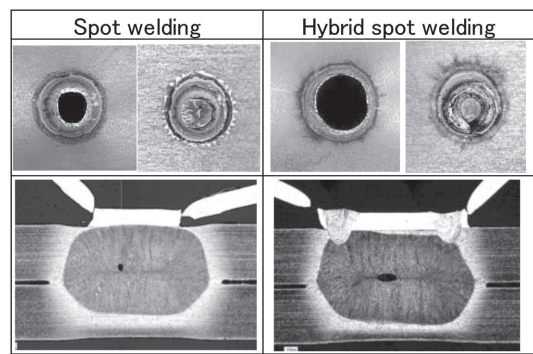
Surface appearance and macro cross-sections of spot and hybrid spot weld after cross tensile test (welding current 6.1 kA)
